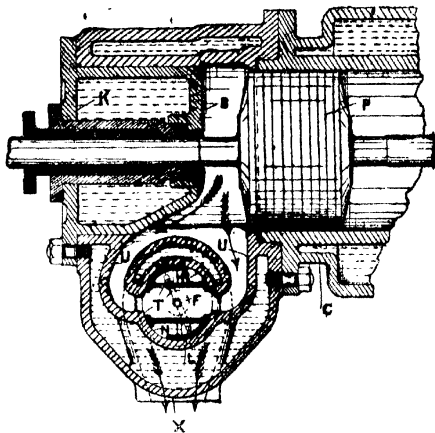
Cross-section of Butler combined admission and exhaust balanced-action rotary valve for 20 in. double acting engine
